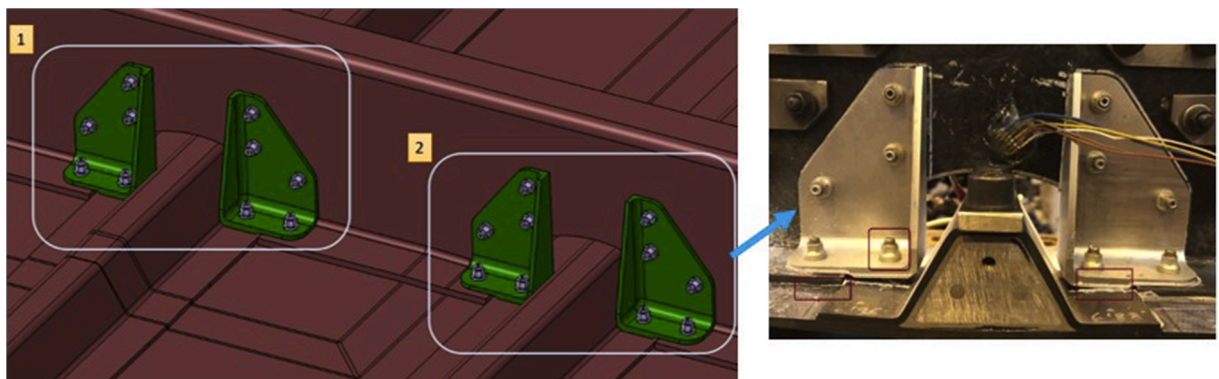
Reinforcement fittings riveted in mouse hole test specimens.
